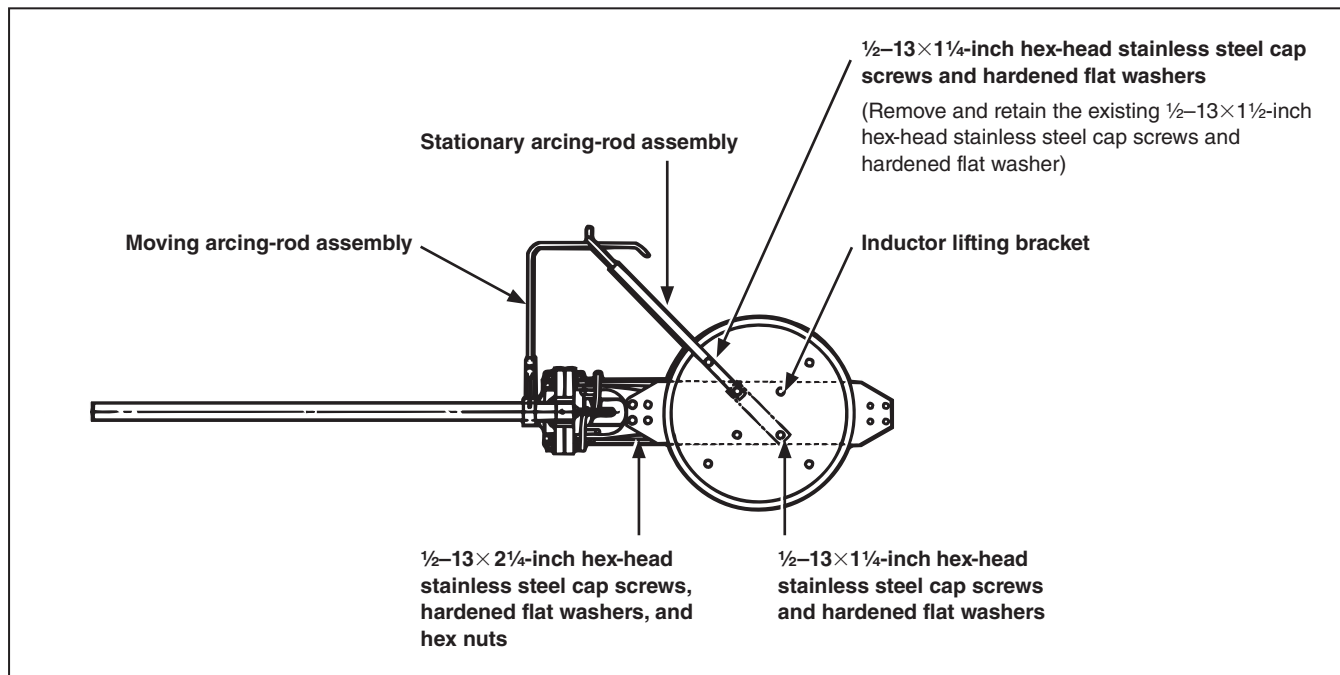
Top view, assembly details of standard-duty pre-insertion inductors for 115 kV and 138 kV vertical-break style circuit-switchers.
